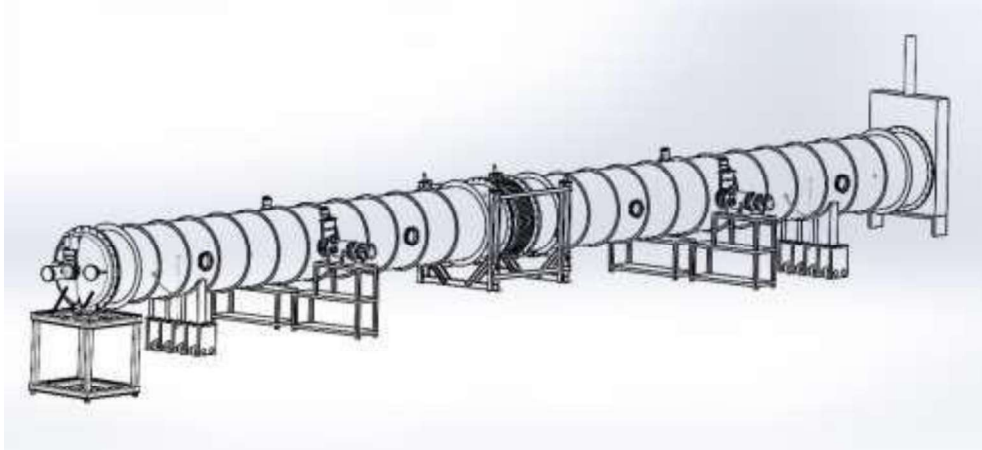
Schematic of Raised support for Equipments and Vessel Assembly
